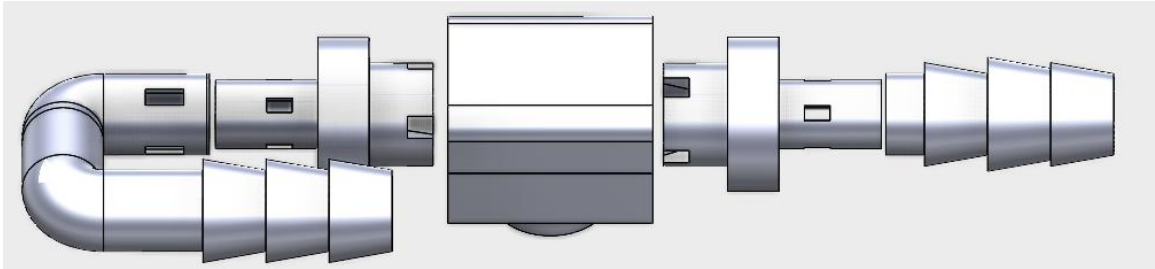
Exploded view of multiple part hollow fiber tube fitting.
